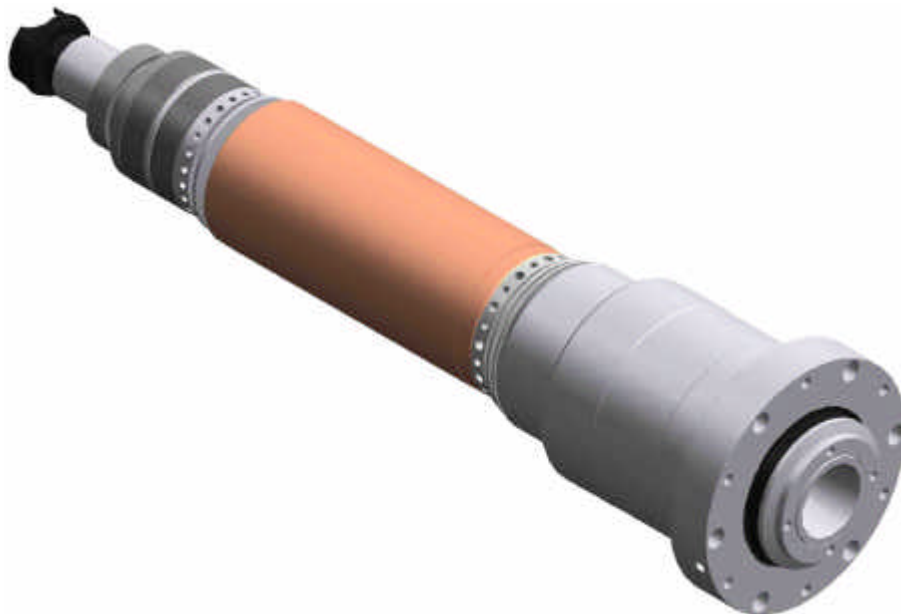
ES919 ISO 30 Long Nose spindle shaft kit
